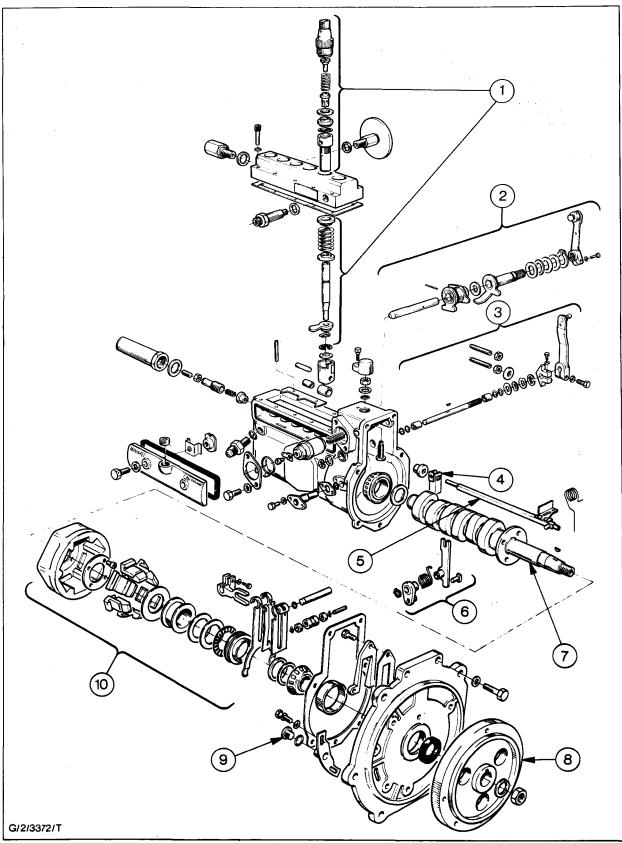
CAV Minimec Injection Pump (Dover) - Exploded
